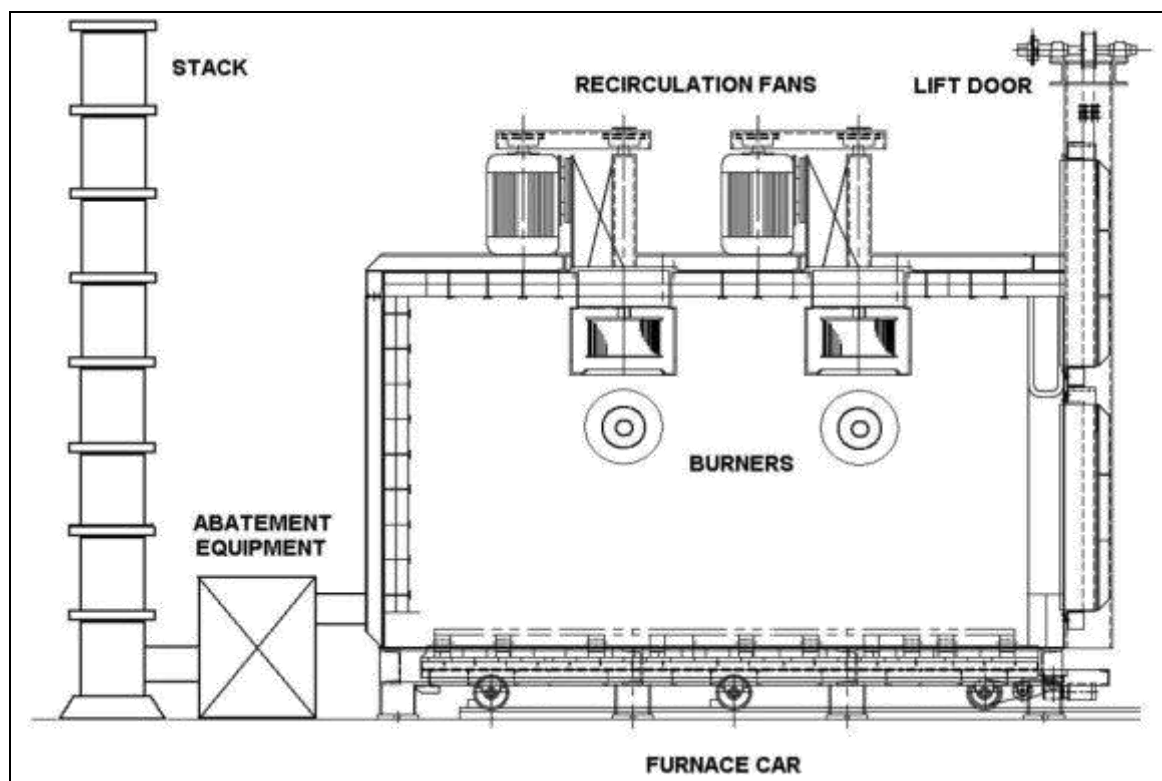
General view of a single chamber furnace (car bottom furnace)
